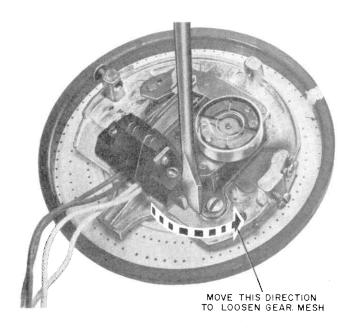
Using Screwdriver to Loosen Gear Mesh
